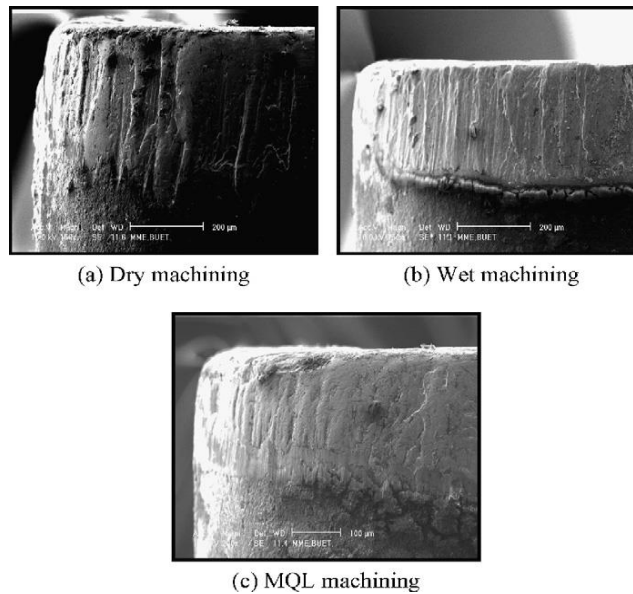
SEM views of principal flank wear of the worn out insert after machining 43 min under dry, wet and MQL conditions [1].
